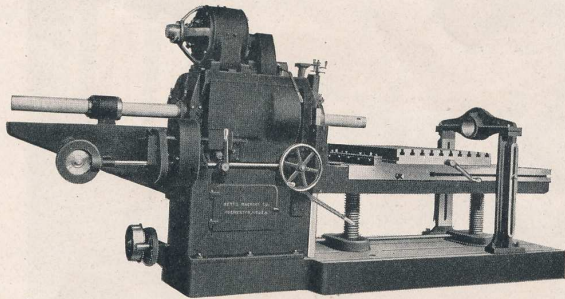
BETTS HEAVY DUTY HORIZONTAL BORING AND DRILLING MACHINE, TYPE A3100
